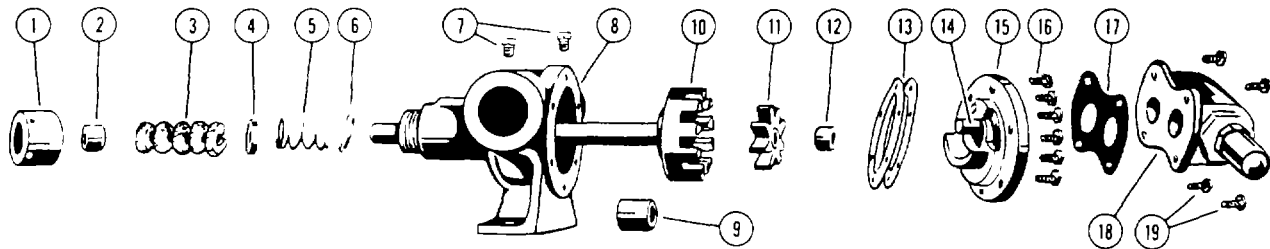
EXPLODED VIEW MODEL G32 PUMP
